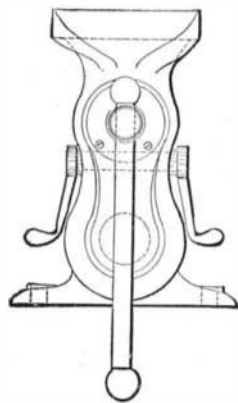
End View of the Vise, showing the Disengaging Handles.
